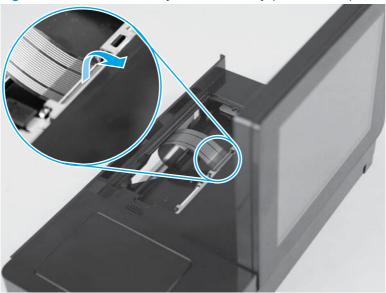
Remove the keyboard assembly (M880; 1 of 7)
